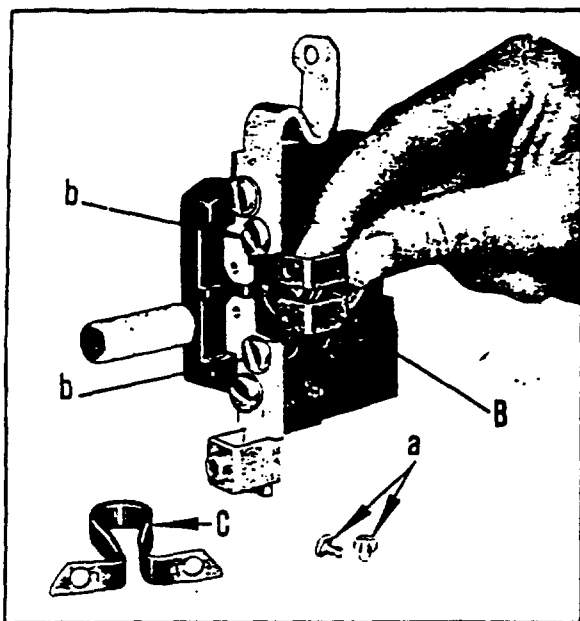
Install Heater "B" in the Relay. Using Small Screws "a" Threaded Into Holes or Install Heater "C" Using Larger Screws "b". Be sure the Looped Portion Enters the Recess in the Relay.
